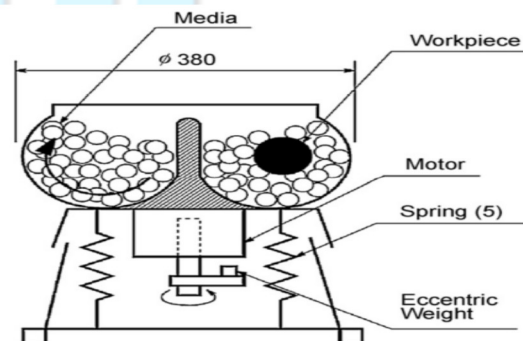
Illustration of Vibratory Bowl finishing machine. [1].
